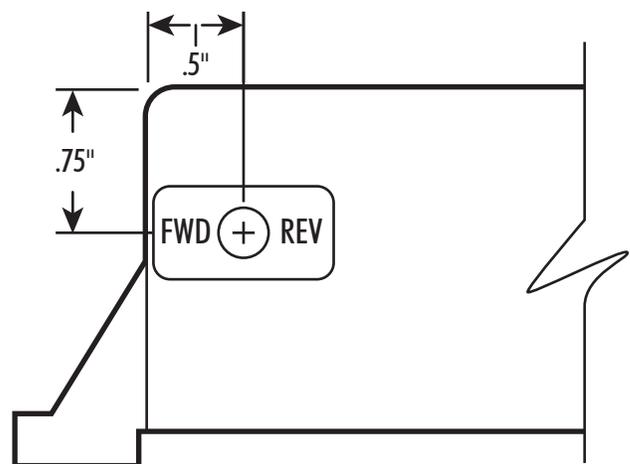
This is a template for labeling the speed control switch. Cut out and glue to the housing, or make a copy and use the duplicate if you prefer to save these instructions.
